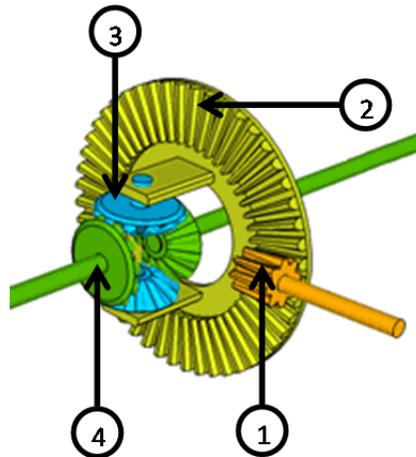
Open differential physical configuration (1: input gear, 2: ring gear, 3: pinion gears, 4: side gears)
